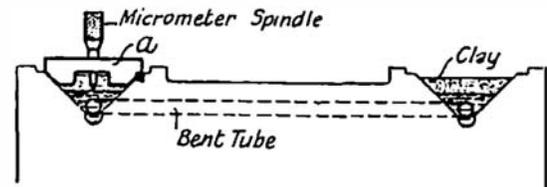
A. Using Vees of Bed as Water Channels when erecting Planing Machine
